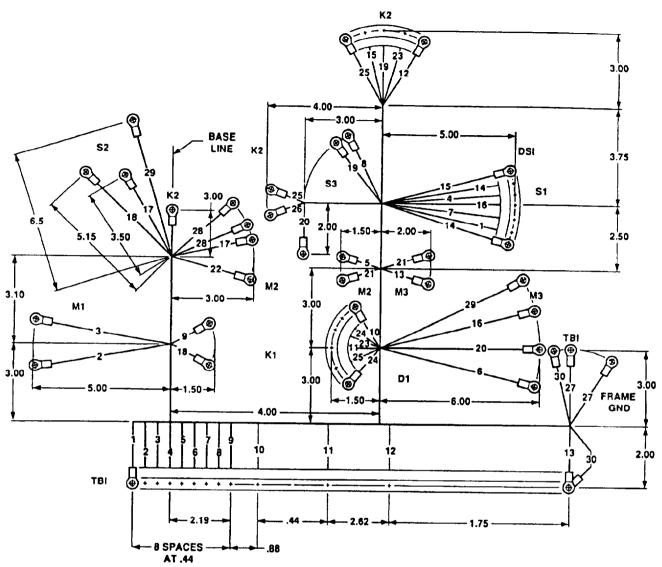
Pump Wiring Harness Assembly (Model 350 PAWN) (Sheet 2 of 2).
